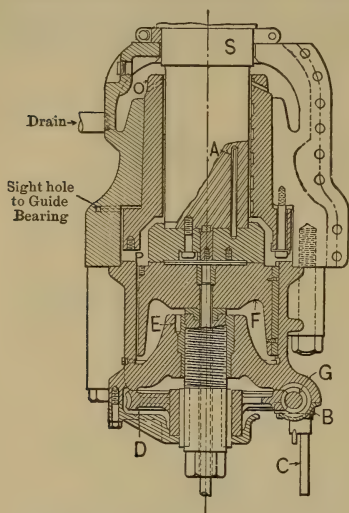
Step Bearing, Vertical Curtis Turbine.
